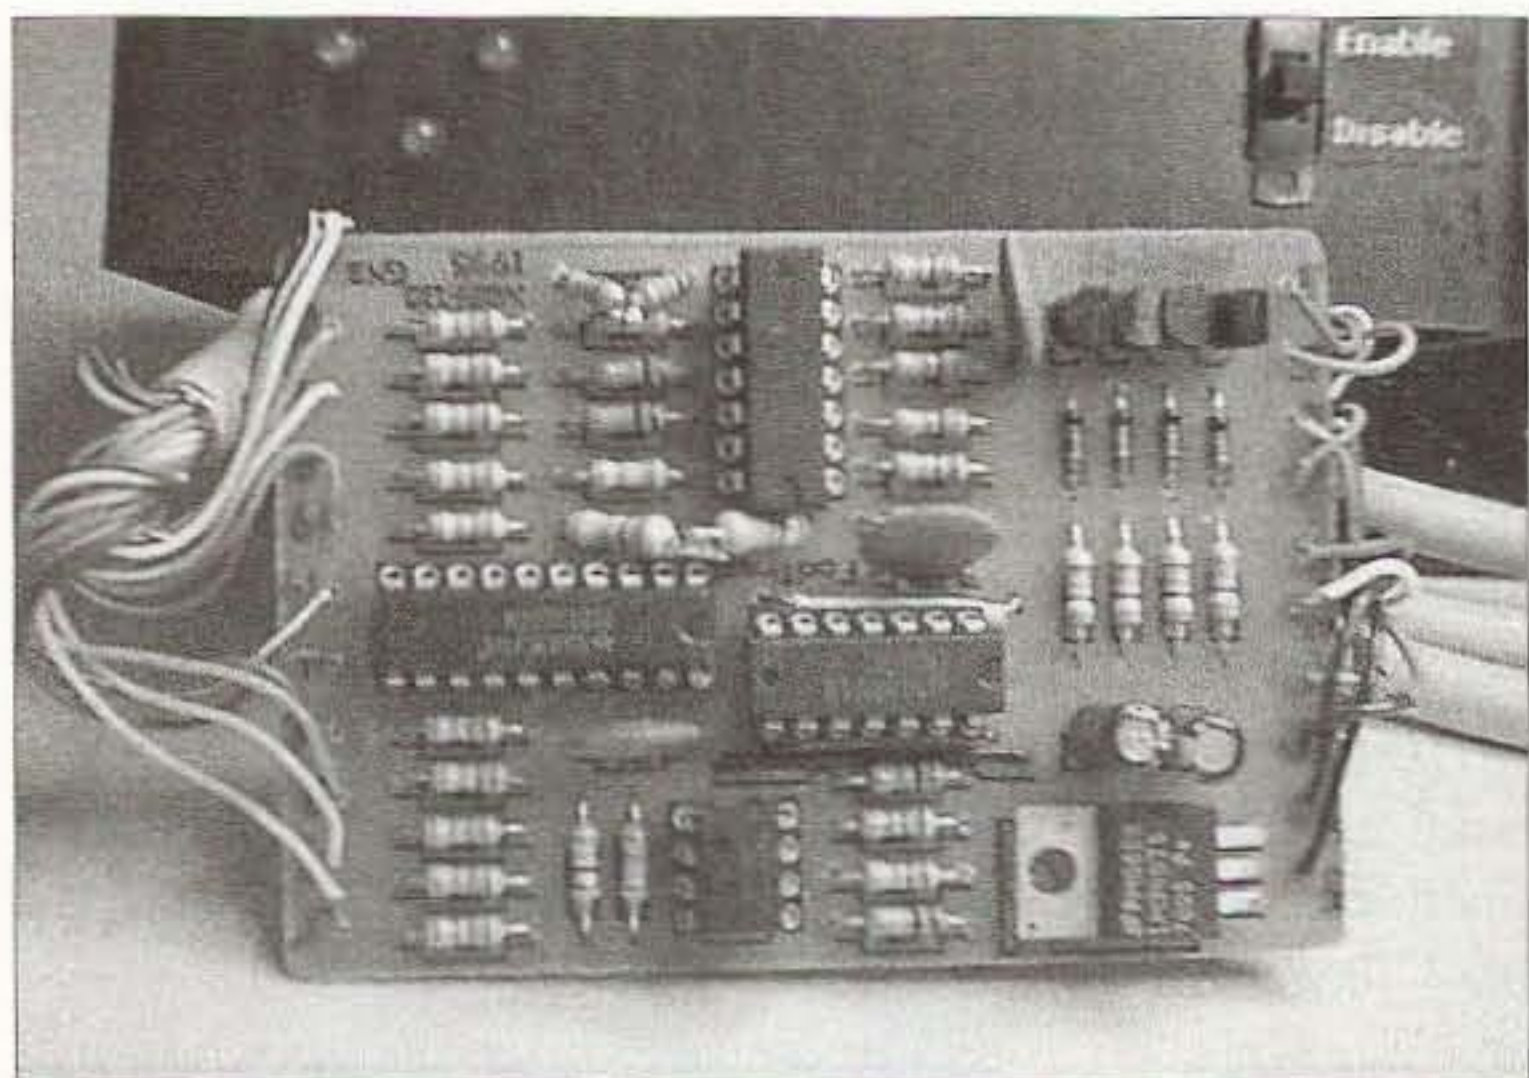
Photo A. Here is a view of the completed circuit board. My junk box came in handy for this.
